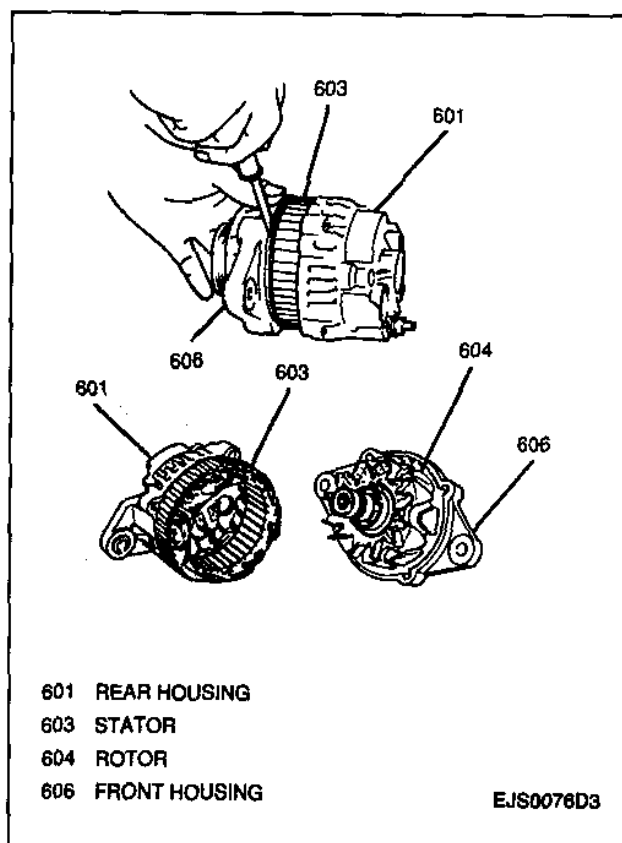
Removing Front Housing (With Drive Pulley and Rotor)
